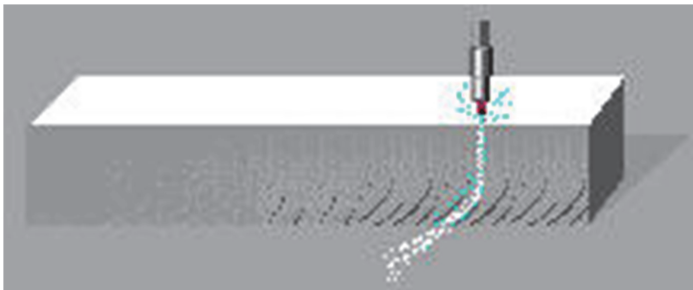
Waviness of the cut surface (Source: Waterjet machining tolerances, 2011, <http://waterjets.org>)
